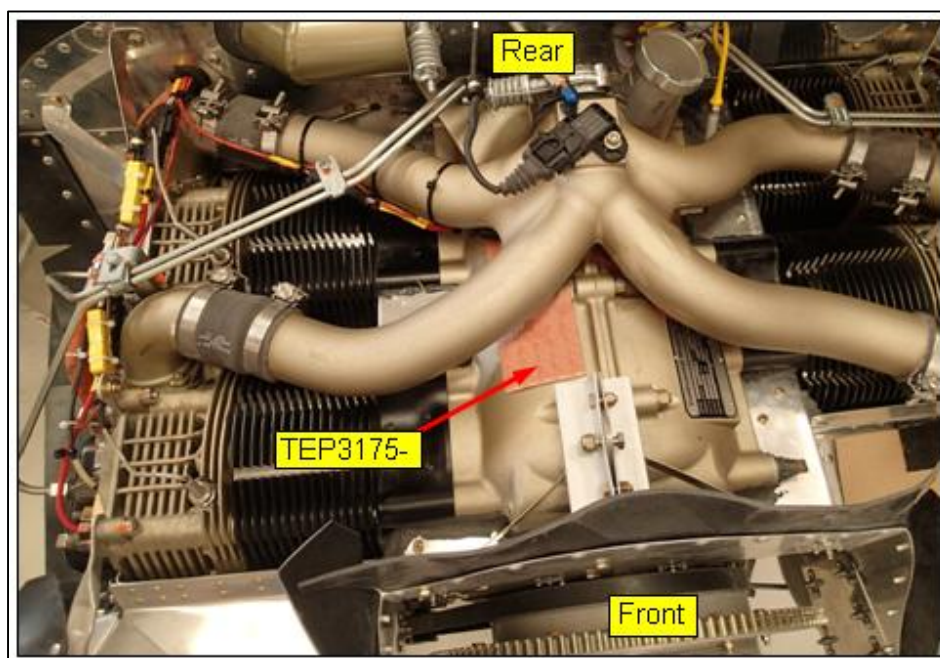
Upper engine crankcase element, locate on upper right side of crankcase lead aft to follow No. 2 intake tube to right rear baffle penetration.
